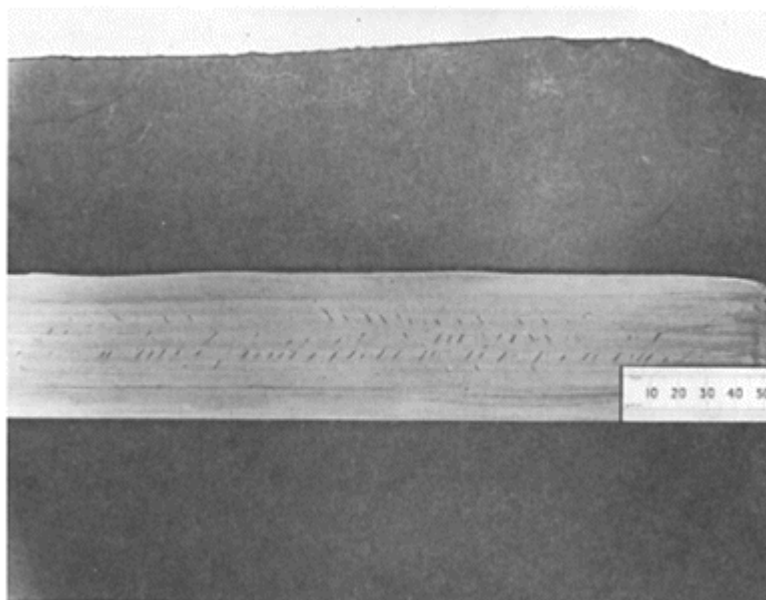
Longitudinal section of a weld metal in a C-Mn steel showing chevron cracks.
